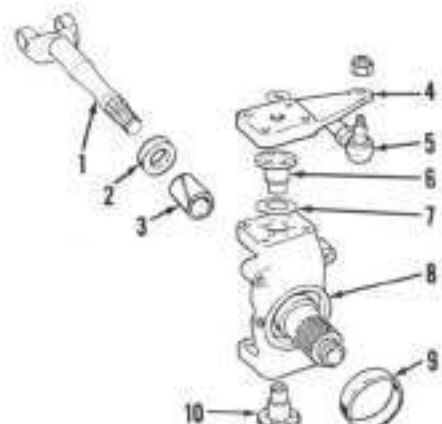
Exploded view of David Brown front drive stub axle showing component parts and their relative positions.
